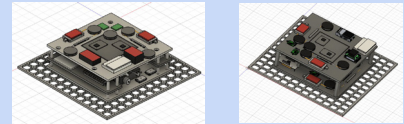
(Left) Early draft of assembly, contains three levels to mount parts. (Right) Final assembly, minus half-plates out to the sides, contains extra components to complete necessary electrical connections
